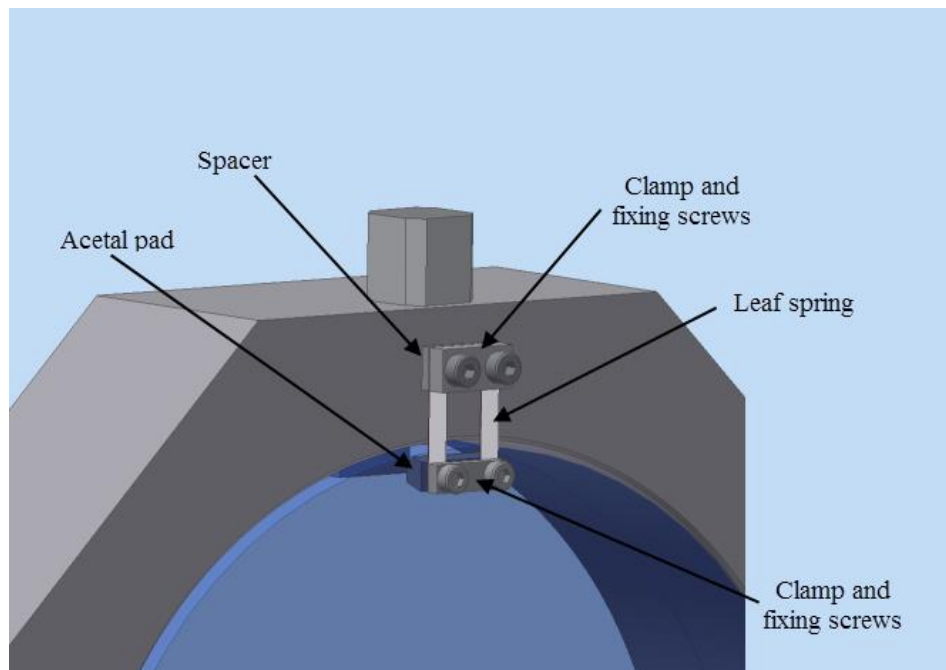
Detail of the retaining clip for the lens and mirror. The acetal pad is clamped to the leaf spring using the clamp plate and fixing screws. The retaining clip is then fixed to the mount using a spacer and another clamp plate with fixing screws.
